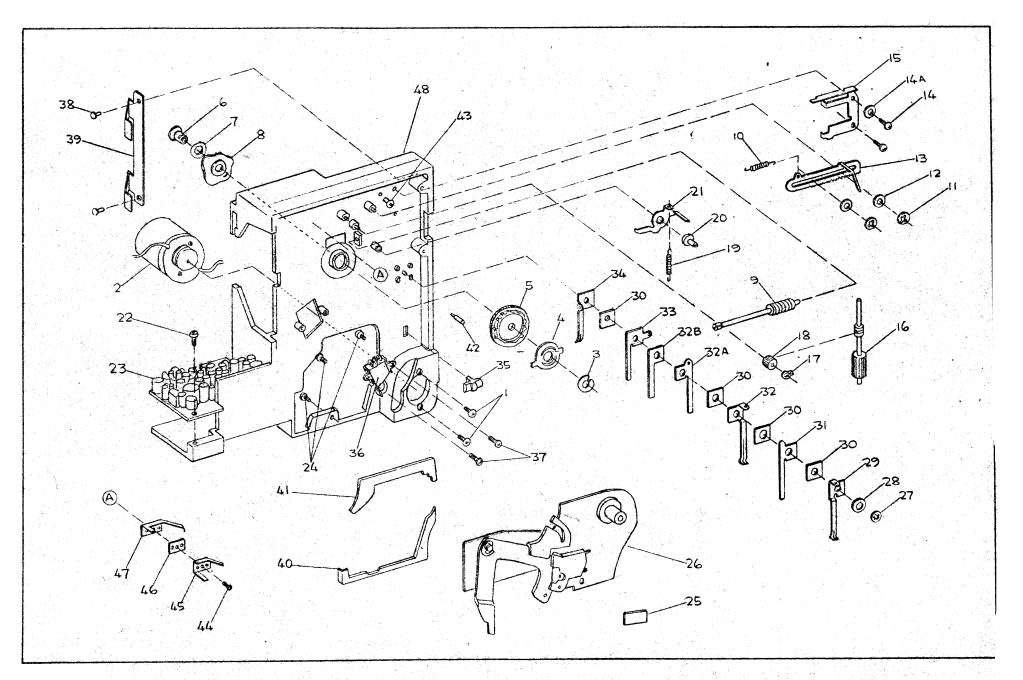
Rear Chassis Assembly - SUPPORT CASSETTE -
